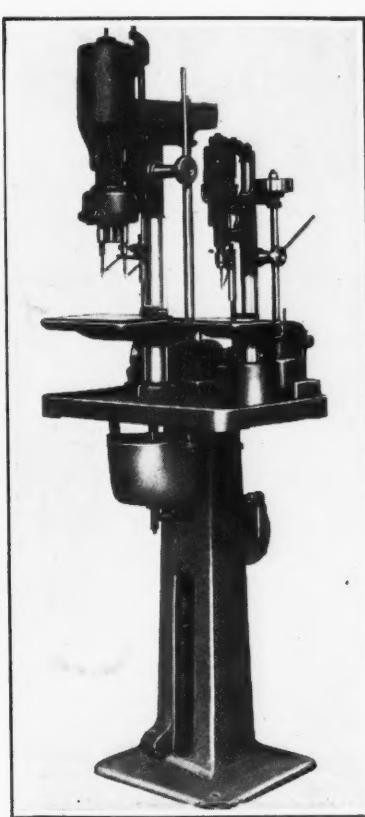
Machine for drilling Piece shown at B, Fig. 1
